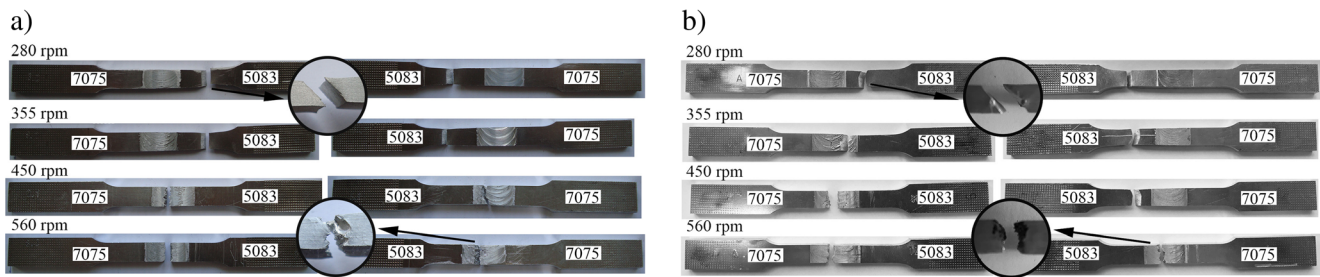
Location of fracture in tensile specimens. a Triflute pin. b Threaded taper pin
